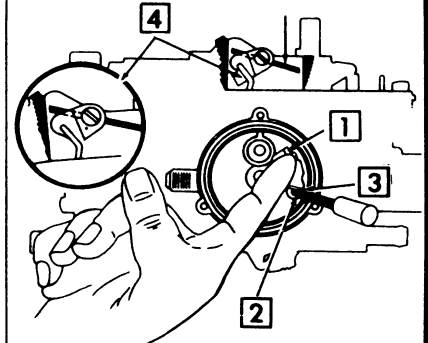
FIG. B ACCELERATOR PUMP ADJUSTMENT & ROD LOCATION
